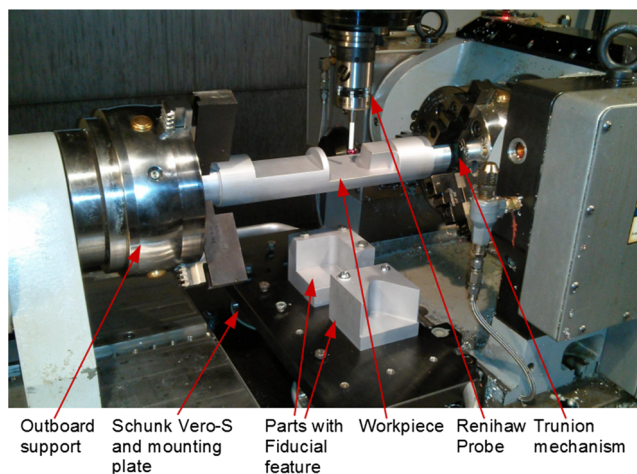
Setup in a HAAS VF–3. Trunnion assembly, outboard support, workpiece, pallet system, fiducial parts and Renishaw probe are visible
